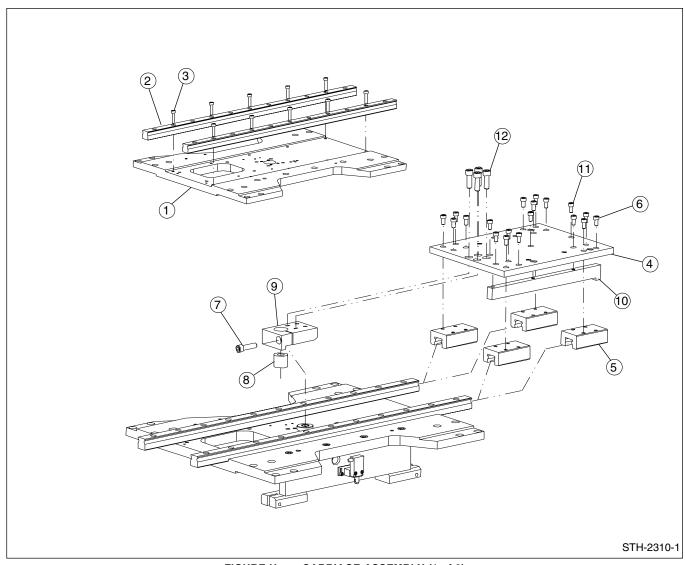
FIGURE H - CARRIAGE ASSEMBLY (1 of 3)
